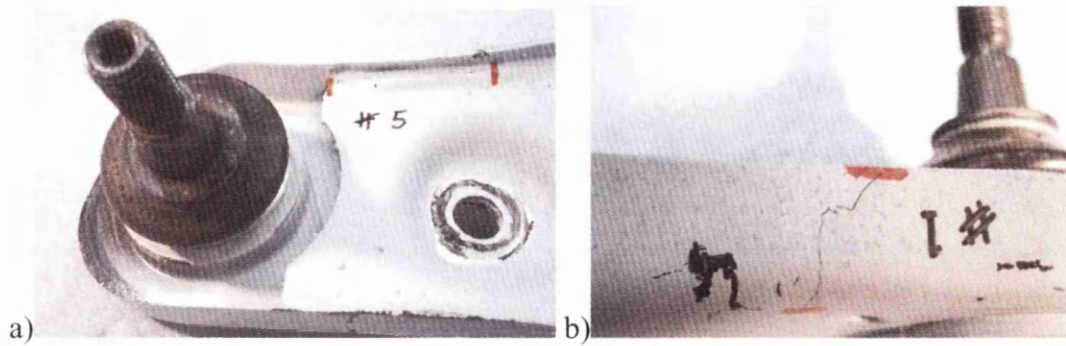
Typical Failure Locations in the FUCA a) Crack Propagation through the Weld Throat, b) Crack Propagation from the Weld Throat into the Parent Metal
